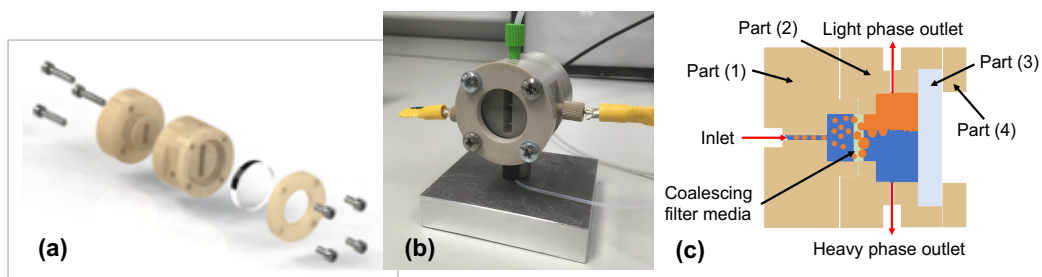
(a) Exploded view of lab-scale coalescing separator. (b) Assembled photo of lab-scale coalescing separator. (c) Sectional view of the coalescing separator annotated to show the fluid path through the device.
